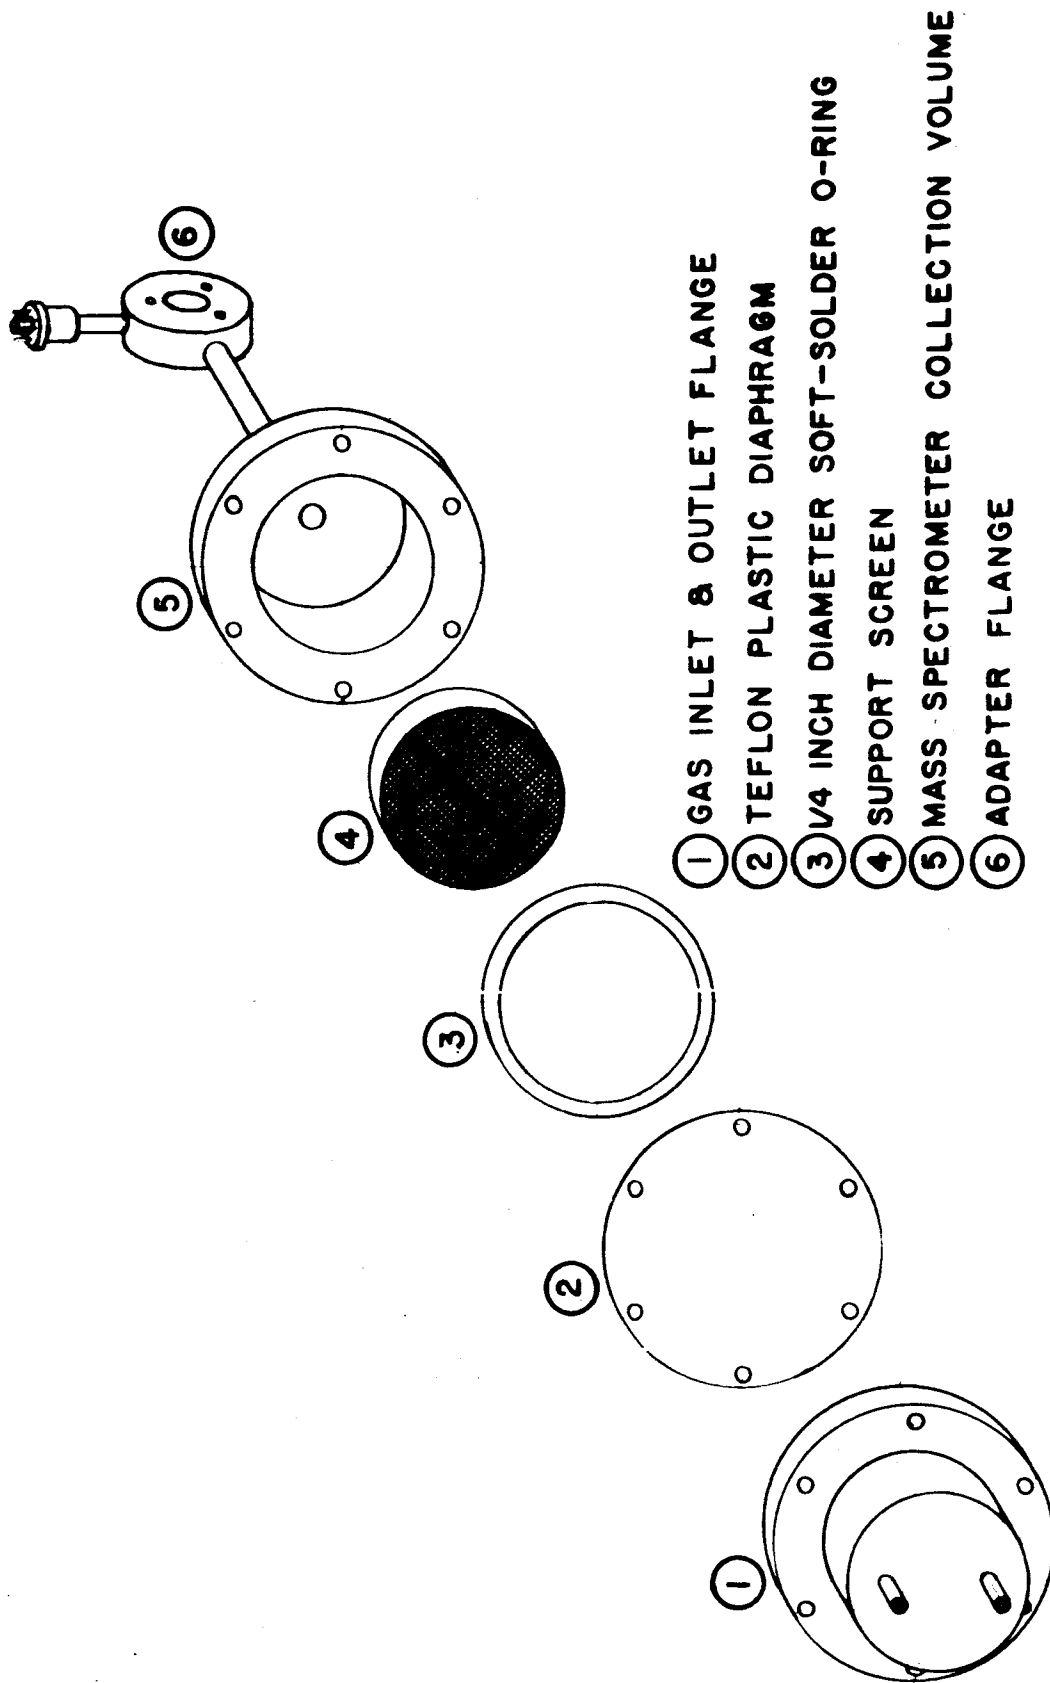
EXPLODED VIEW OF LEAK RATE STANDARD APPARATUS
